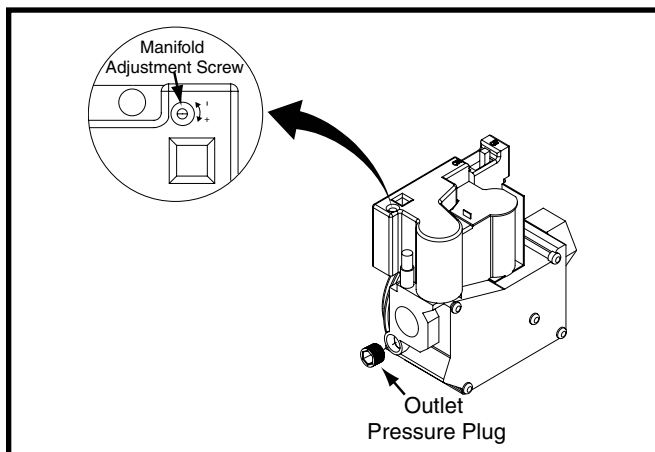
Outlet Pressure Plug and Manifold Adjustment Screw
